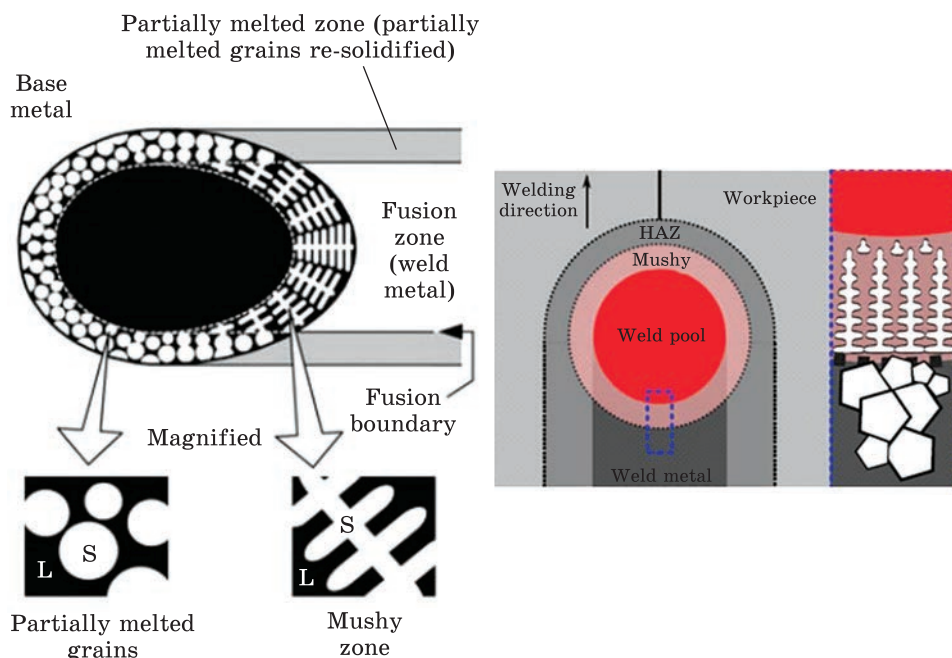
A diagram showing partially molten grains of the base metal and a mushy zone around the alloy welding bath during welding (e.g., ring welding), where S, L, and HAZ denote the base-metal grains, the intergranular liquid, and heat-affected zone, respectively [73, 74]
